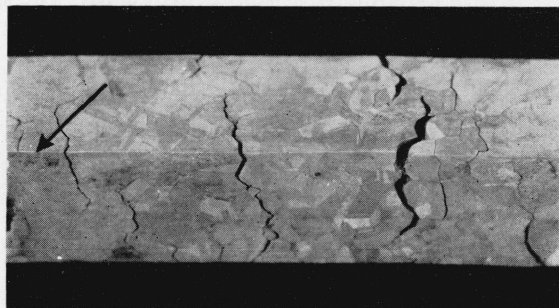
Specimen showing stress-corrosion cracks extending from the corner (marked by arrow) into the adjoining surfaces of specimen. $\times 2$
